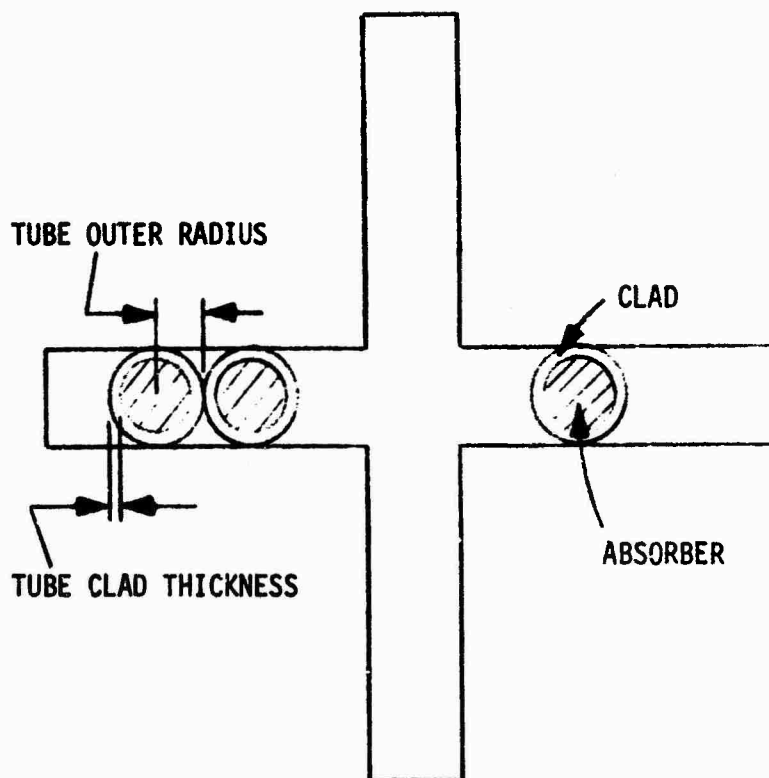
TUBE FILLED CRUCIFORM CONTROL
